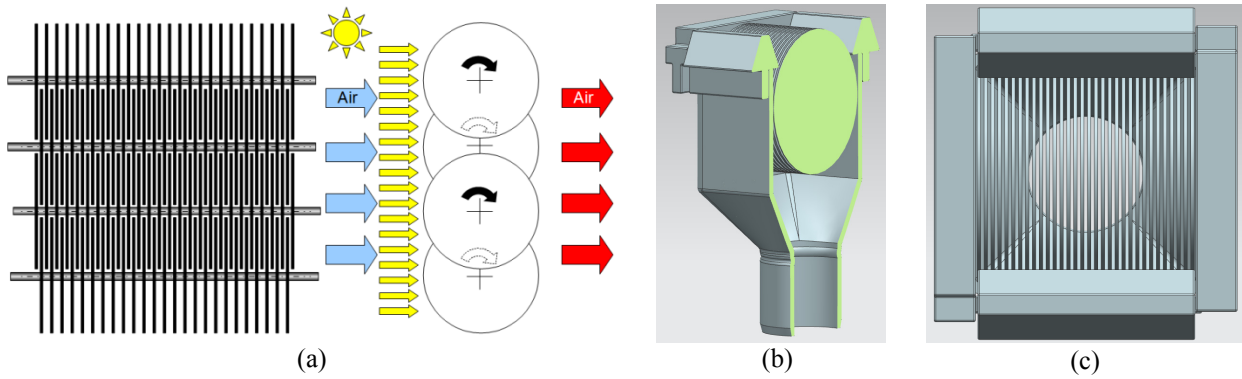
Rotary disc absorber concept (a), Rotary disc prototype 3-D section (b), Rotary disc prototype front view (c)
